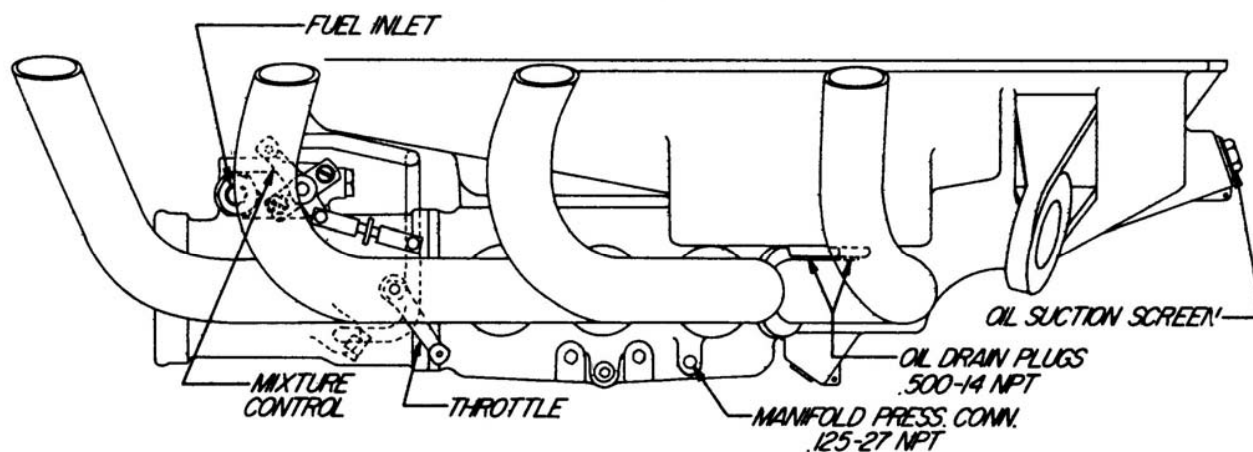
Lower Right Side View – Typical IO-720 – Front Inlet
